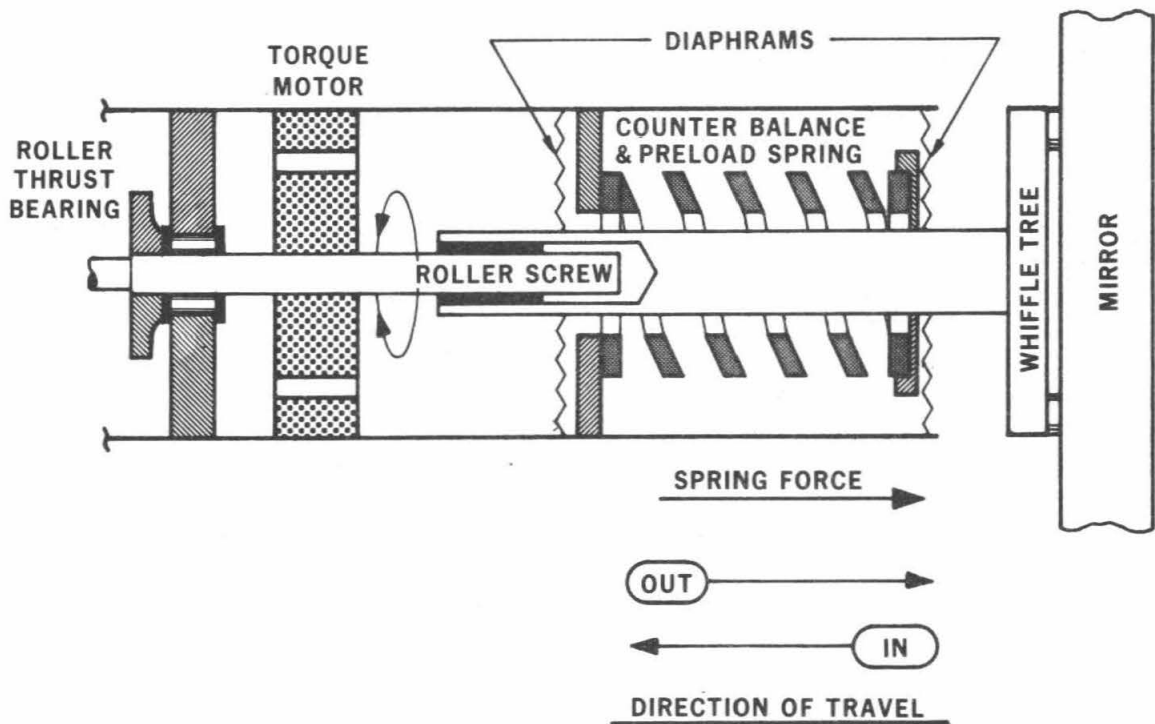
Drawing showing the major components of the actuator; the outer housing, preload spring assembly, torque motor-roller screw assembly, optical encoder, and drive electronics.
